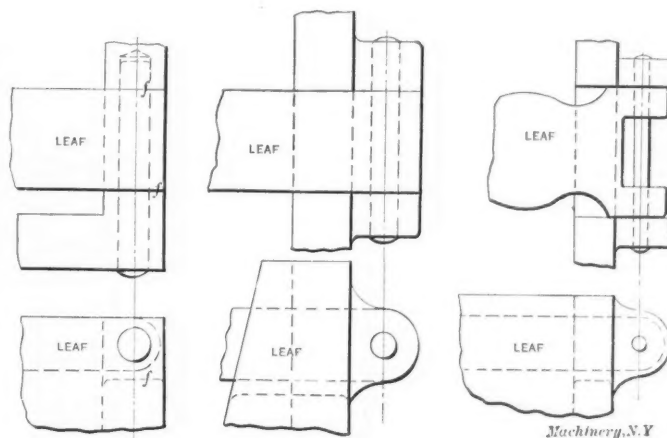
Detail Designs of Joints between Leaf and Jig.
